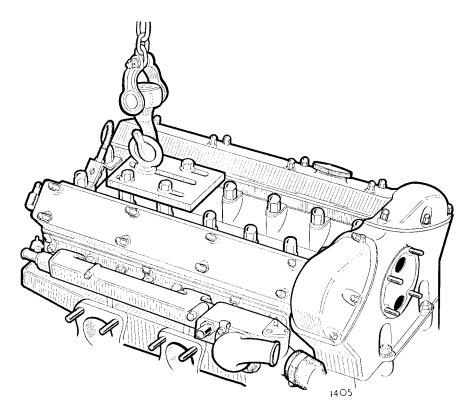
Showing the lifting plate in position on the cylinder head studs.
